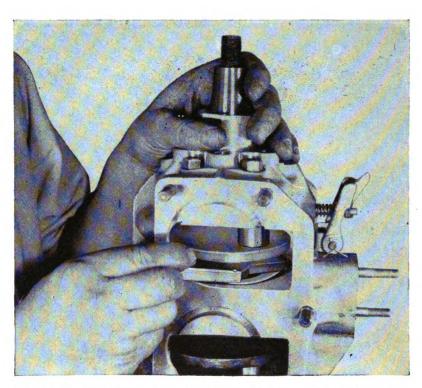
Checking clearance of crankshaft and centerbearing. (Clearance should be 1.1809 to 1.1813 inches for top and bottom of centerbearing.)
